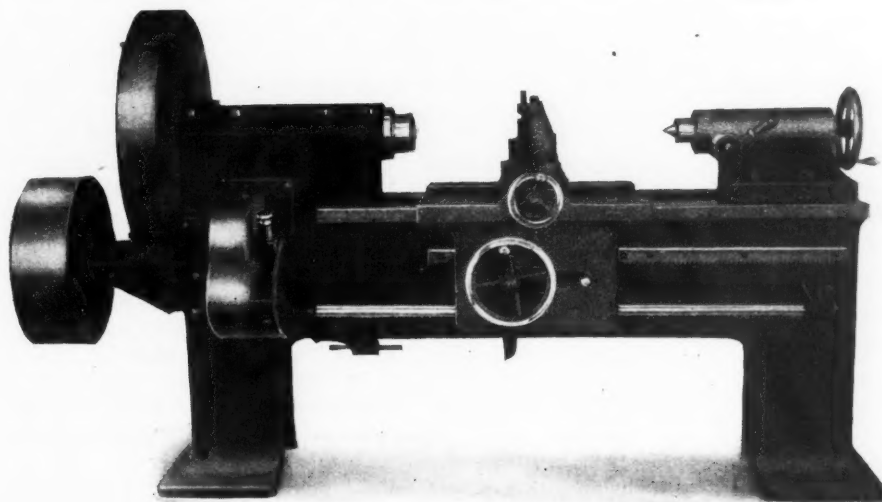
Pottstown 17-inch Lathe for machining 6-inch Shells
